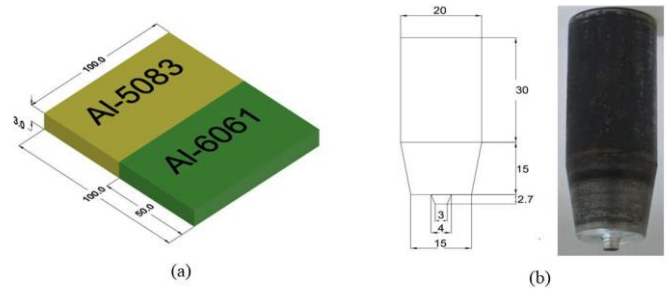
(a) Base Materials Dimension, (b) FSW Tool
